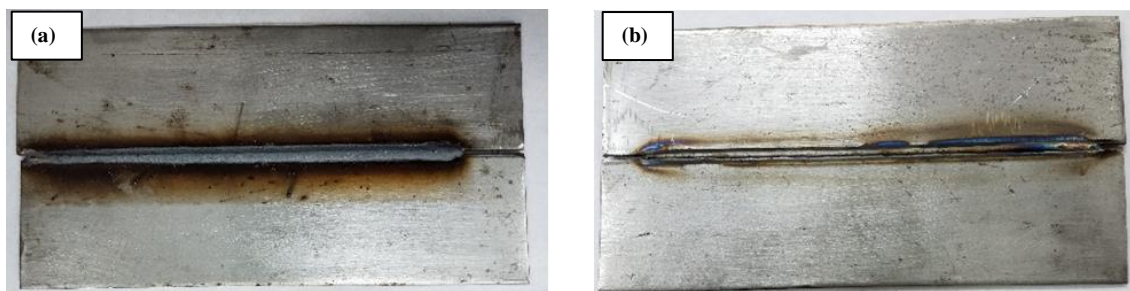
Image of the final weld sample: (a) top surface, and (b) bottom surface.
